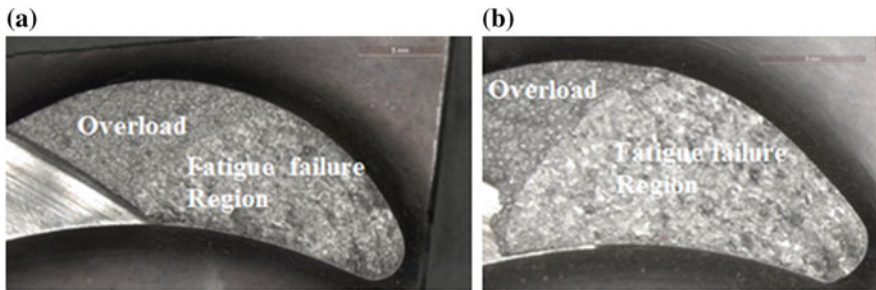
Fracture surface of the blade after fatigue test for both the manufacturing processes at low magnification a ECM and b CNC milling
